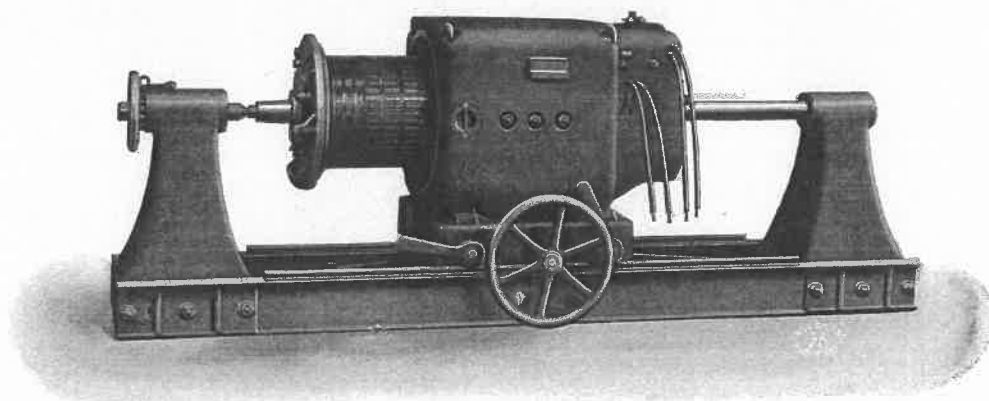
Frame-head bolts withdrawn and frame moved partially along the bed of the machine by means of the handwheel
